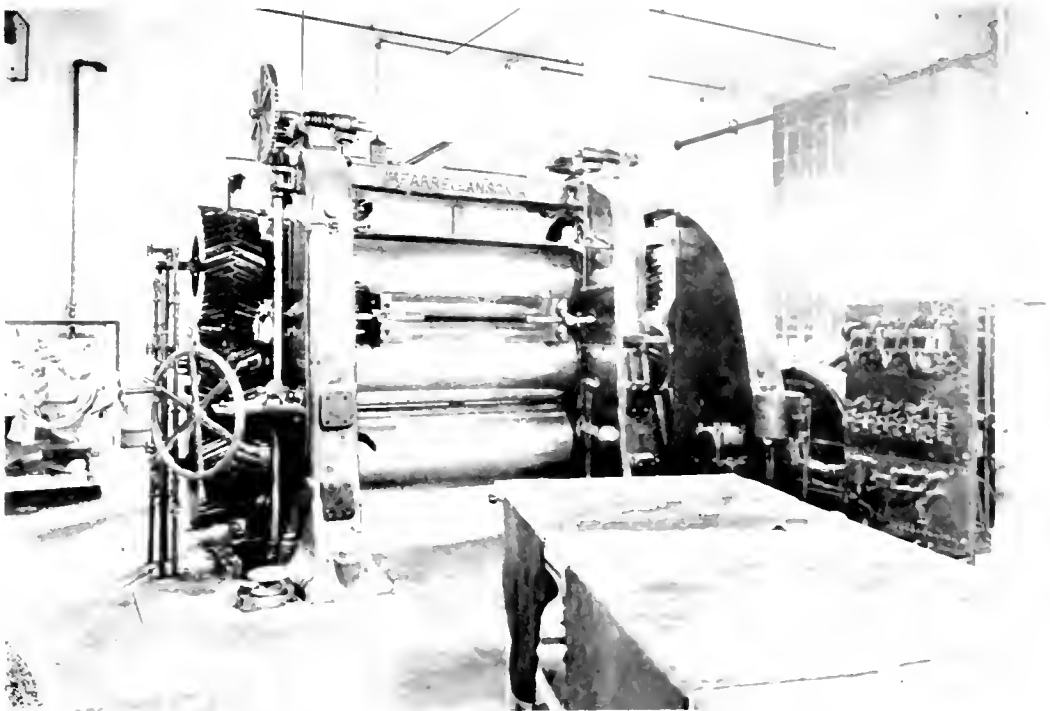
Cooper Hewitt Lamps Illuminating Machinery Used in the Preparation of Rubber for Shoes
